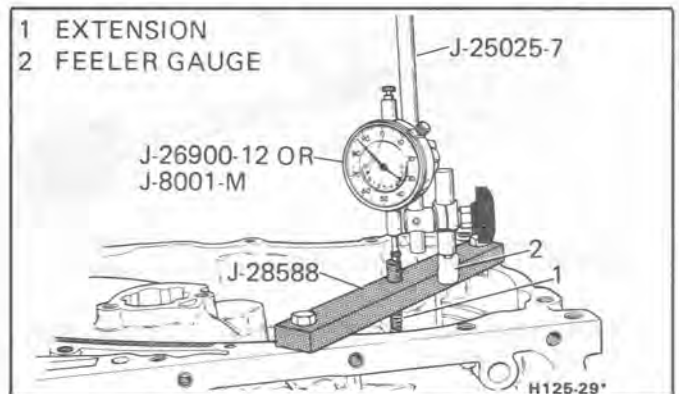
Selective Snap Ring End Play (Sun Gear/Input Drum)
